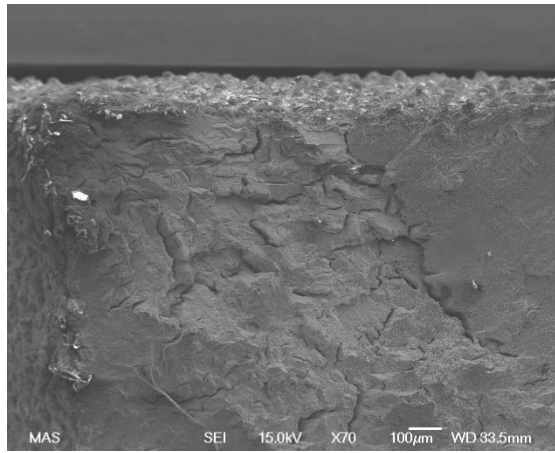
99 B28 HIPped x70 Fracture Surface
